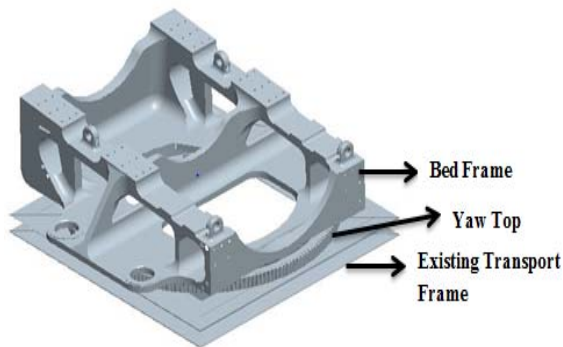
The assembly view of existing transport frame model with bed frame and yaw top.
